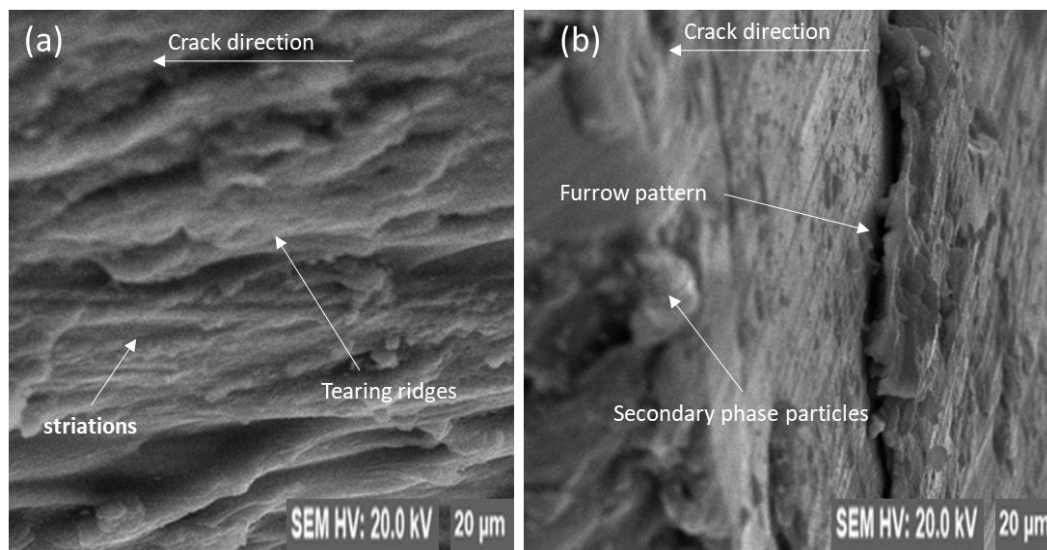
Final fatigue fracture morphology of Al alloy 7075-T7, (a) countersunk rivet hole, (b) perpendicular rivet hole.
